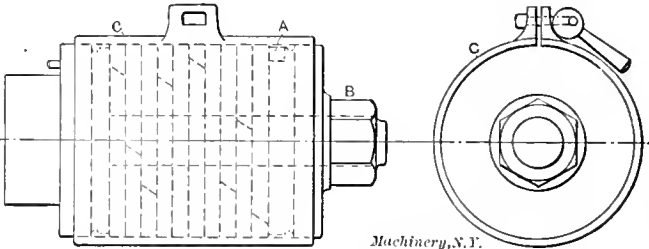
Fixture for Holding the Rings while finishing the Outside.
